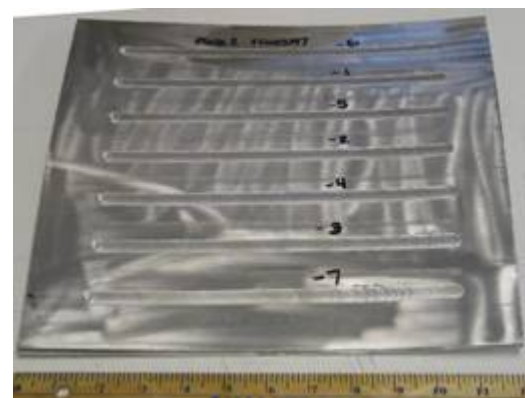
Linear Friction Stir Welded multisheet pack prior to SPF testing. This configuration is designed to produce the “3 sheet with hat stiffener” structure. Alternating linear welds are made from each side of the multisheet pack using a pin that penetrates only through the upper two sheets.
